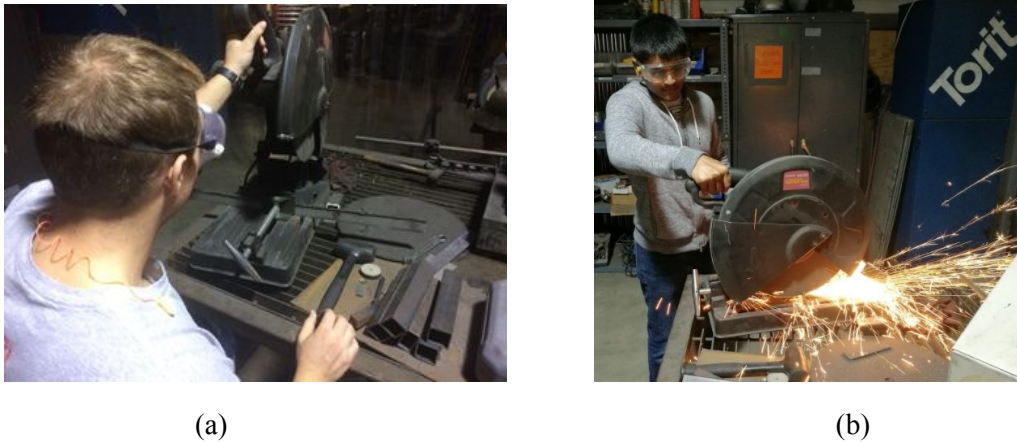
(a) Aligning Metal to be Cut and (b) Cutting Metals to the Proper Lengths.
